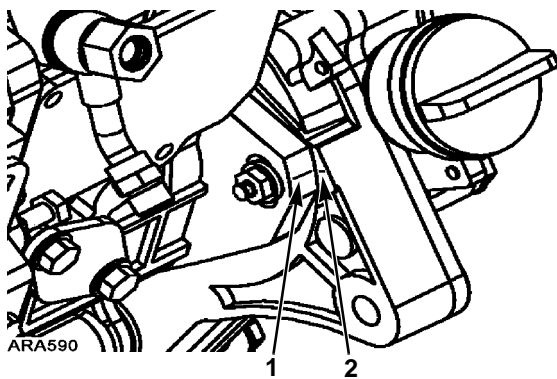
Remove Fuel Injection Pump Gear Nut and Lock Washer
